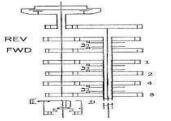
Schematic layout of 8 by 8 tractor gearbox [8]
